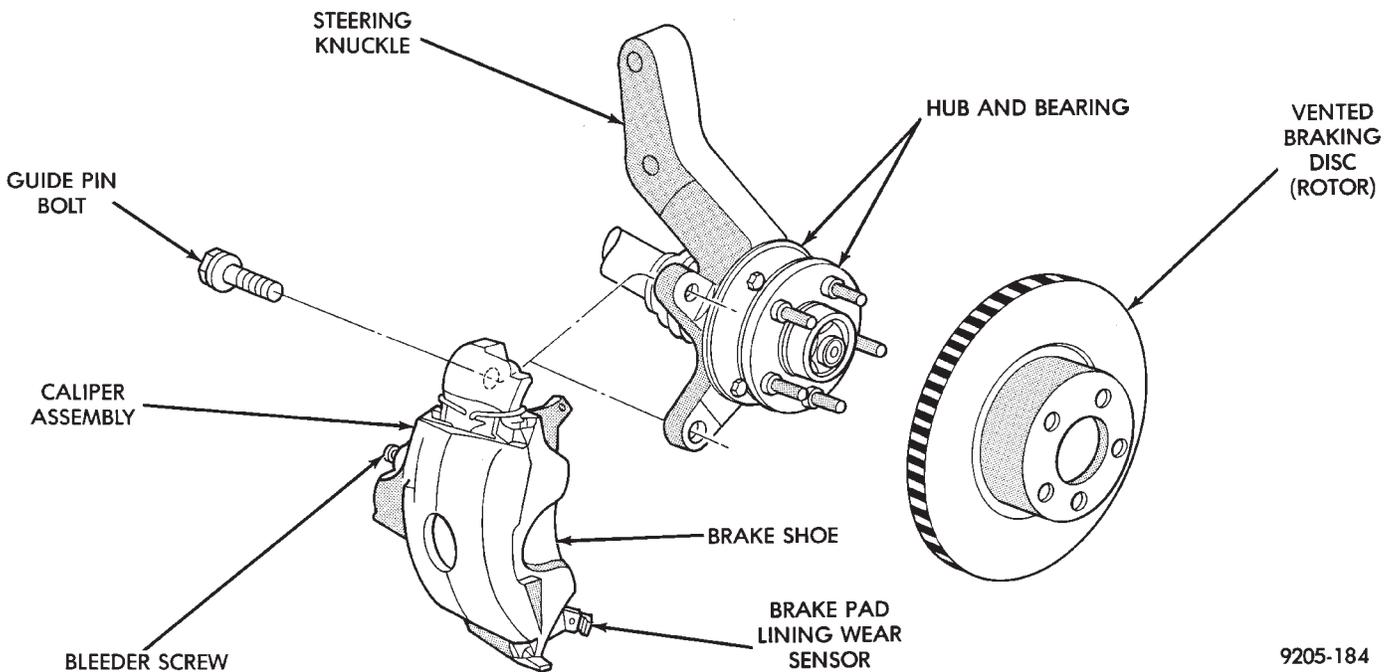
Disc Brake Caliper Mounting (Family Caliper)
